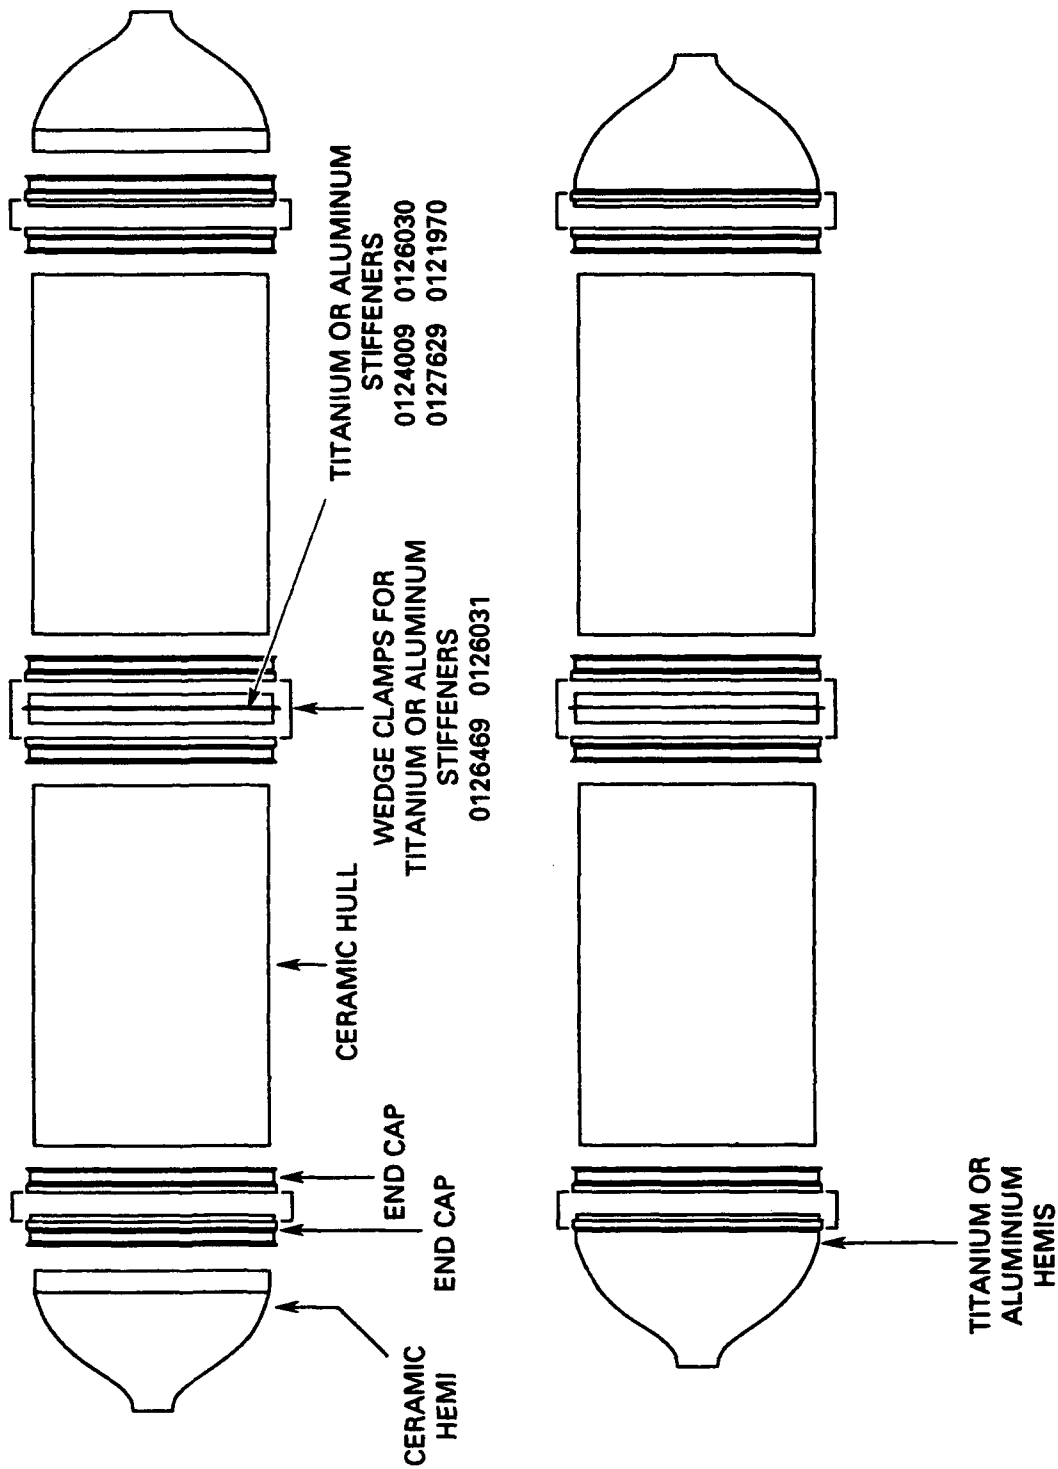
Typical housing assemblies with drawing numbers (multiple cylinder housing).
